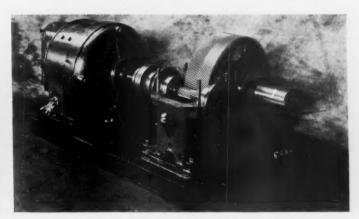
Motor and herringbone speed reducer unit on common base plate; reducer 2:1 and 10:1 for 30 to 300 hp.
